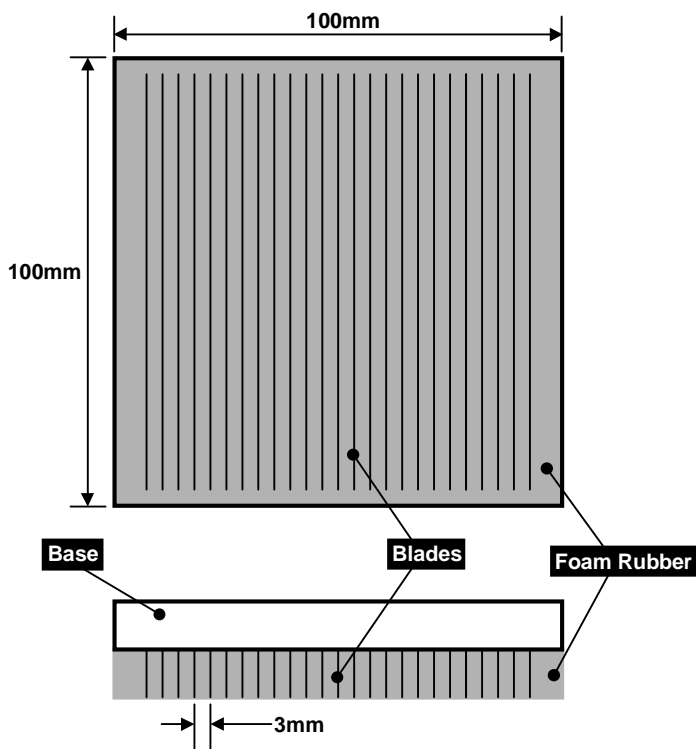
Diagram of the die used to cut wet handsheets (drawing not to scale)
